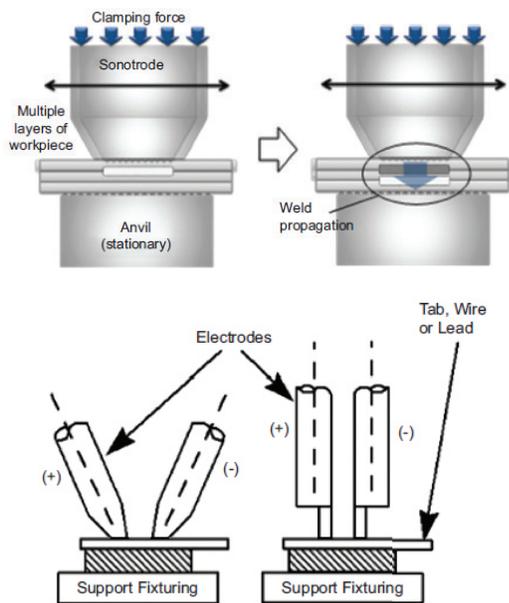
Welding Processes Used in Vehicular Wiring Systems<sup>3</sup>
